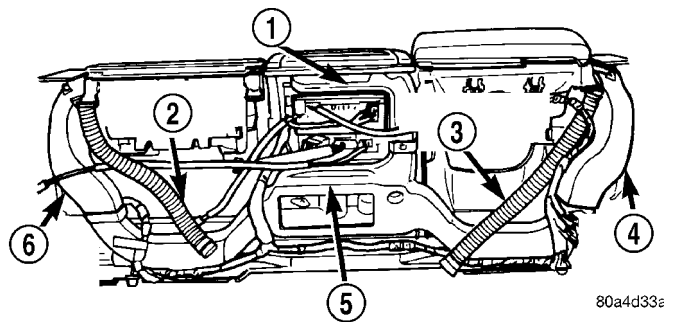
Instrument Panel Ducts - LHD Shown, RHD Typical
